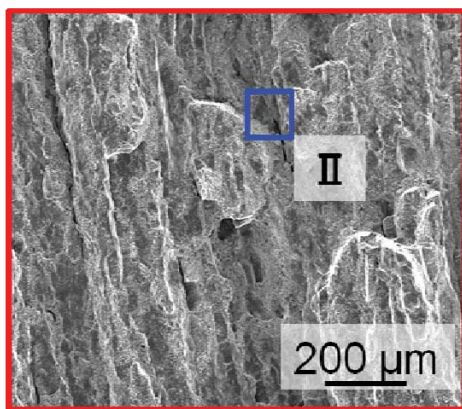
SEM fractographic examination of the welding test with full constraint and a root gap width of 2 mm.
